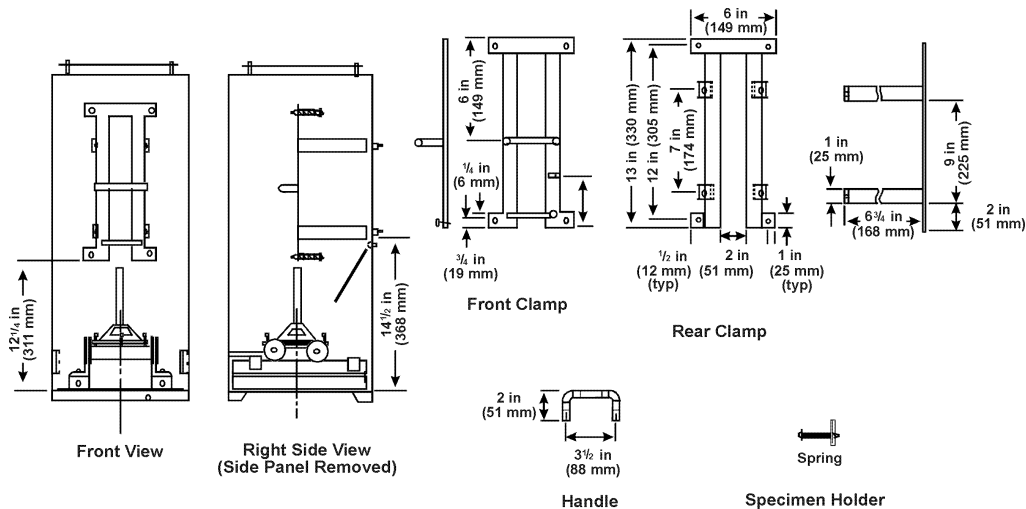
Vertical Bunsen Burner Test Specimen Holder
